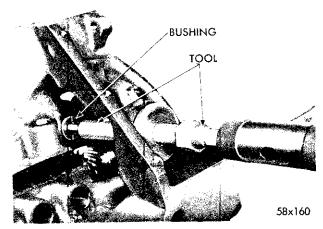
Installing Distributor Drive Shaft Bushing Using Tool C-3053
